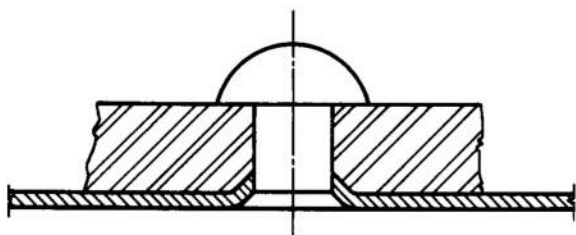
Flush Riveting With a Countersunk-head Rivet
